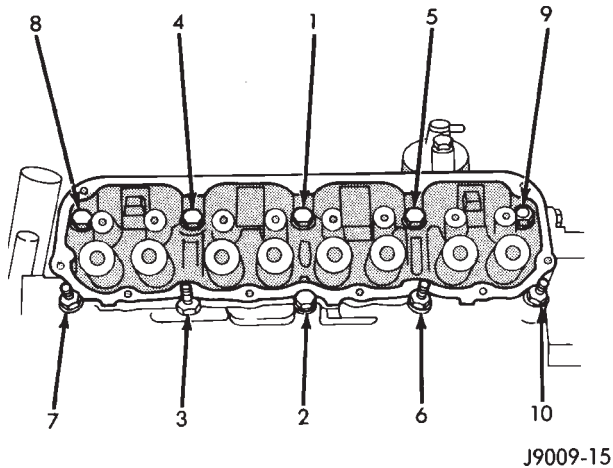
Engine cylinder head Bolt Tightening Sequence
